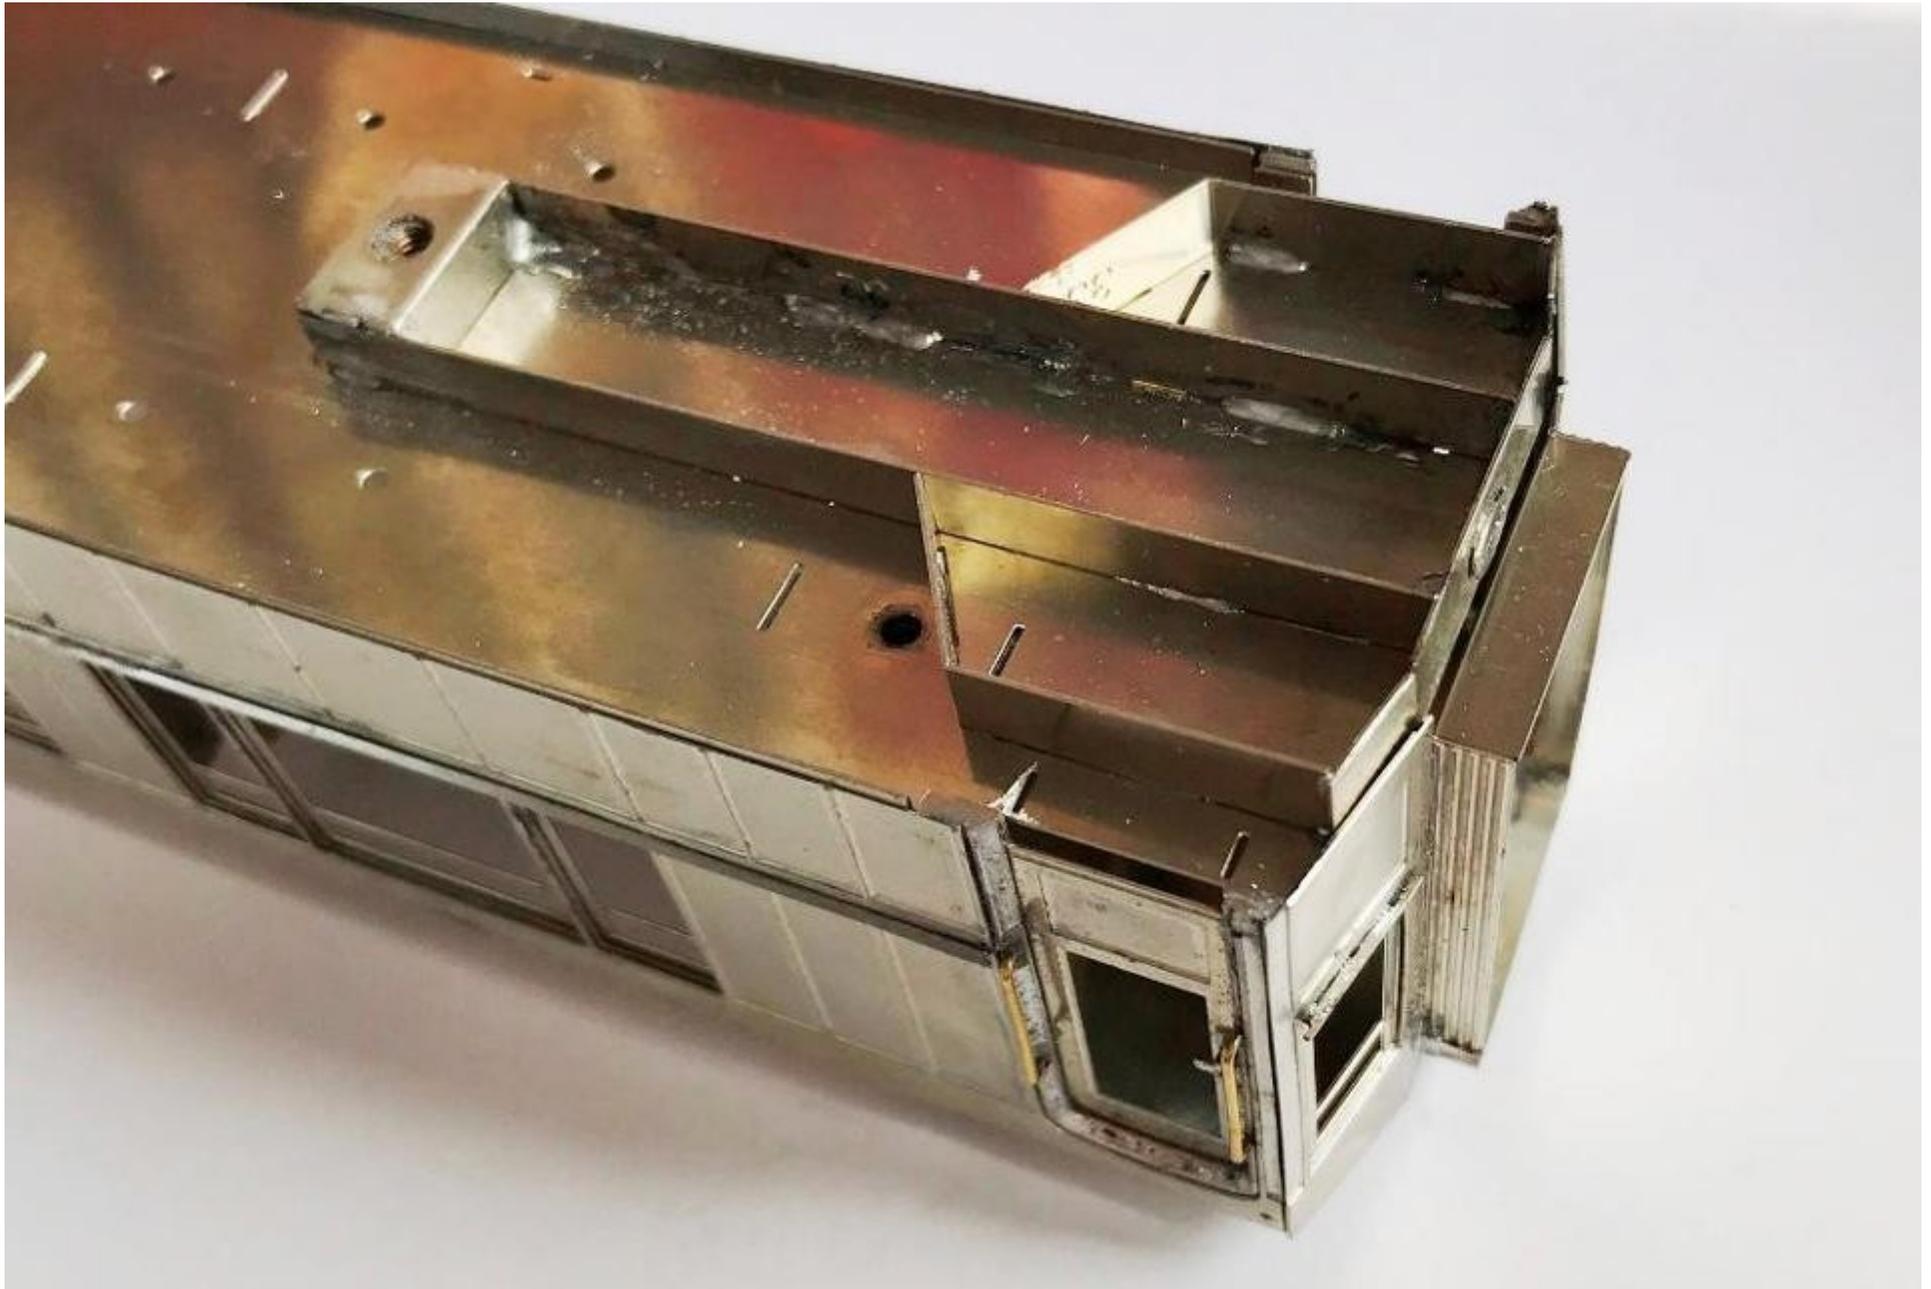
Before unscrewing the floor from the body, the bogie mountings and headstocks were added; this view shows the inner end of the car without side buffers.
